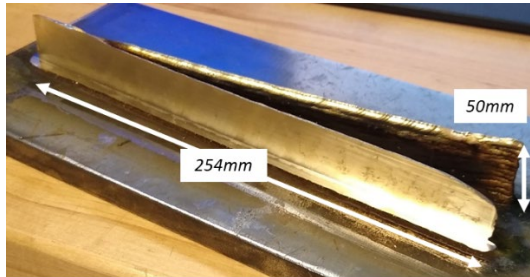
Final part geometry demonstrating the integrated hybrid manufacturing research cell.
